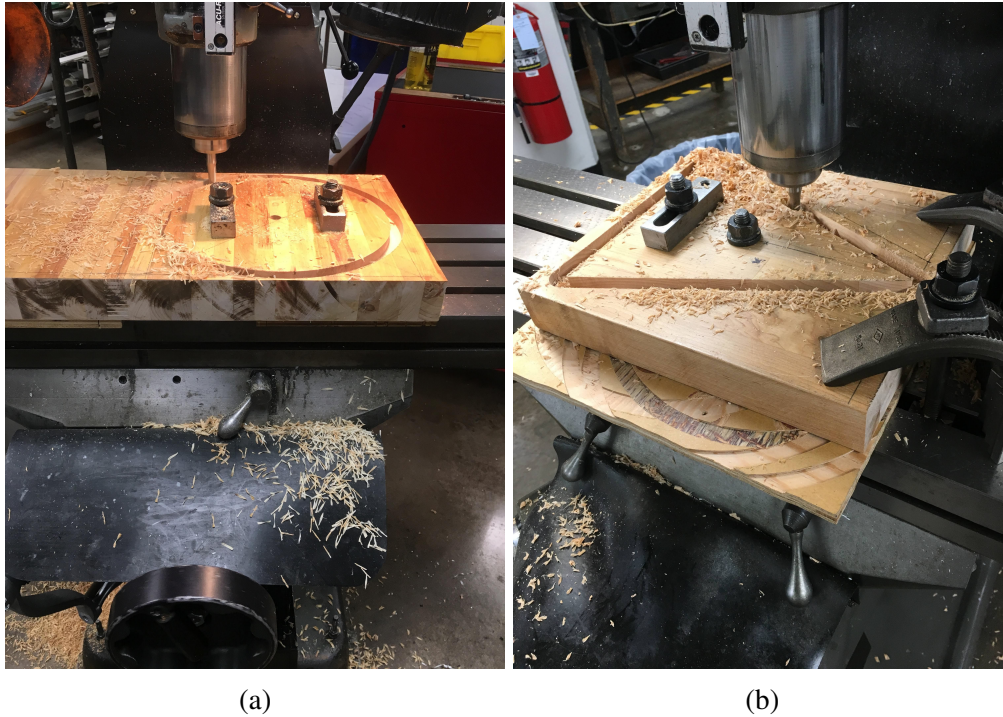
Construction of attachment pieces: (a) wheel segment; (b) wedge segment.
